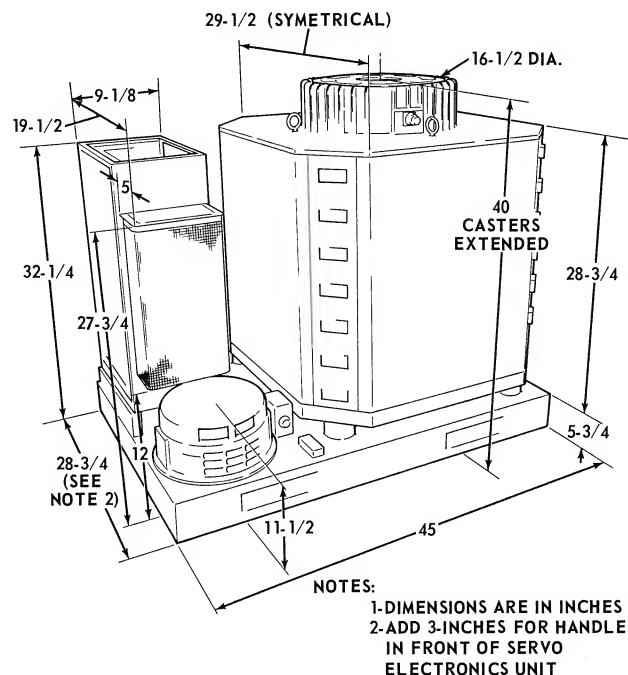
Servomechanism Controlled Auto-Lift Data Storage Drum Subsystem Using Model 185384 Drum, Rear View — Installation Dimensions
